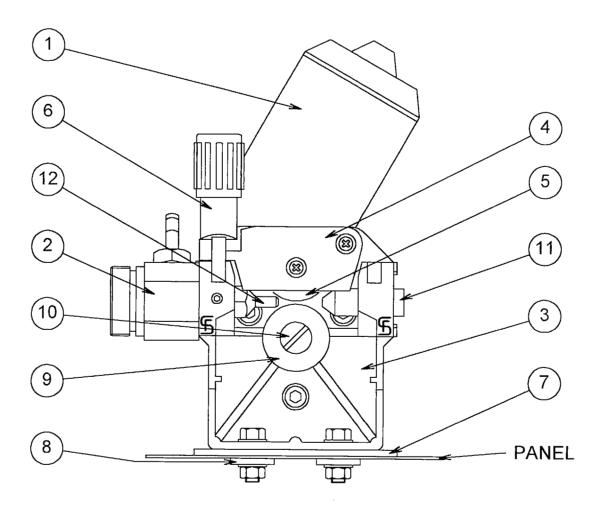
CP109-7 TWO ROLL DRIVE ASSEMBLY
